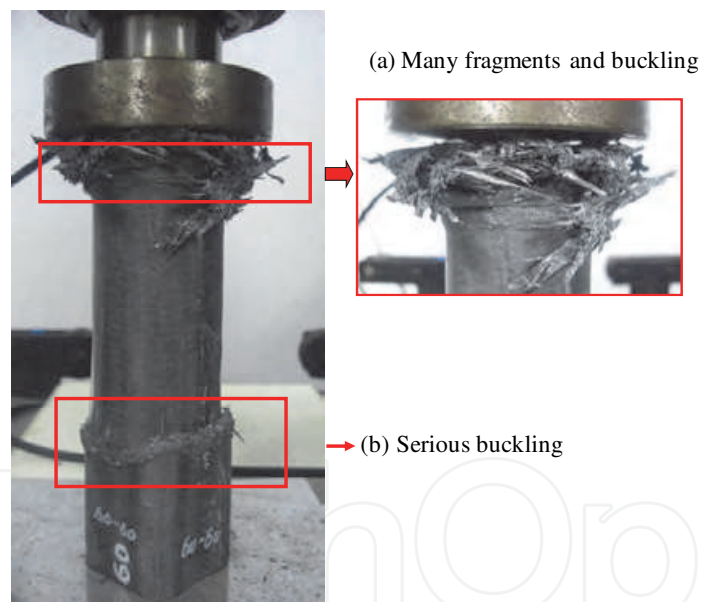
The crushing fashion of Type 60-60 during the crushing process (a) buckling on the top of the circular tube part; (b) serious buckling in cone tube part.
